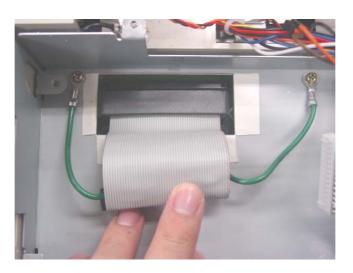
Assembly of Flat Cable to Check Scanner Sub PC Board
